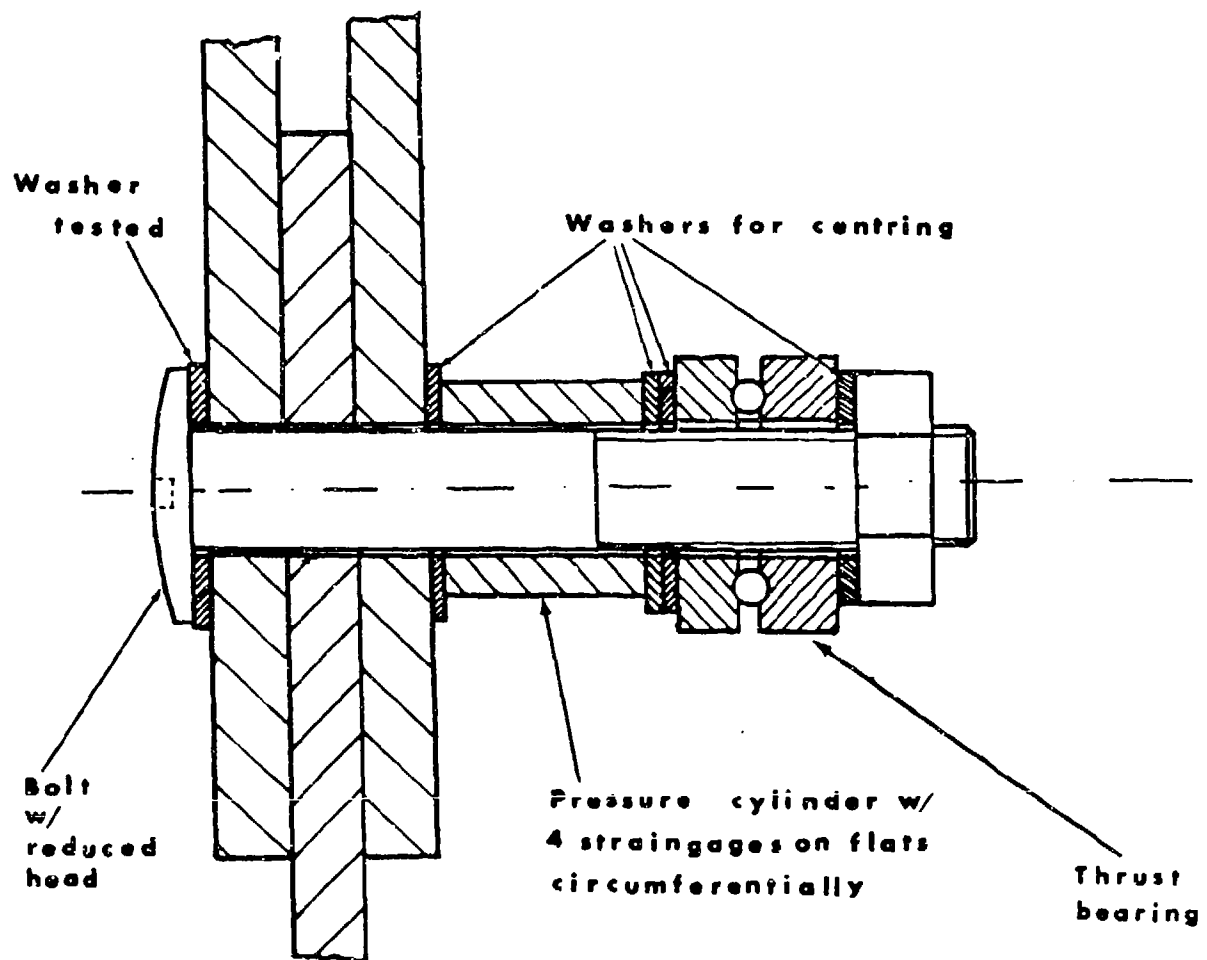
Sectional View of the Bolt and the Clamping Mechanism Integrating a Thrust Bearing and a Clamping Pressure Transducer
